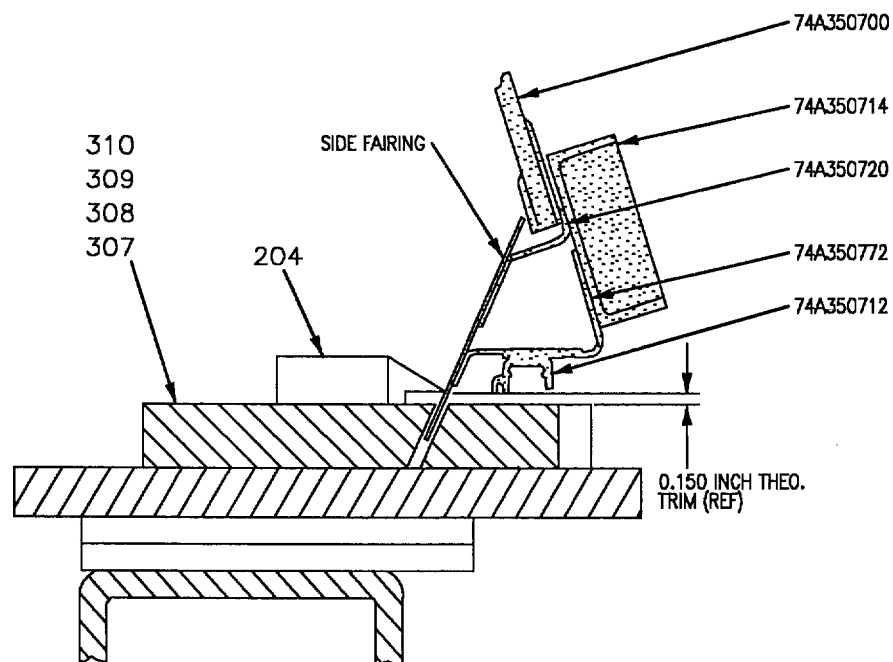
Inspection or Replacement - Side Fairing (Sheet 4)
